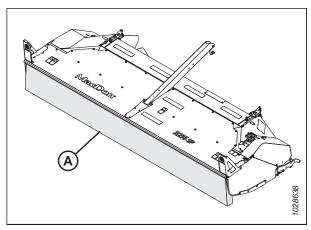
Cutterbar Curtain – Header with Conditioner Shown
